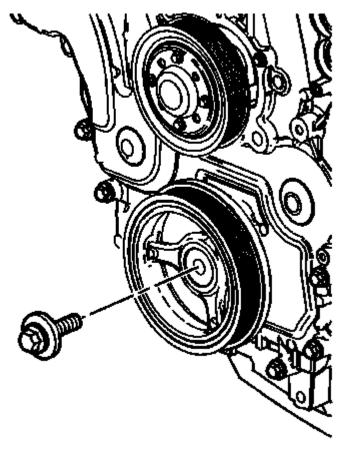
Identifying Crankshaft Balancer Bolt Courtesy of GENERAL MOTORS COMPANY
